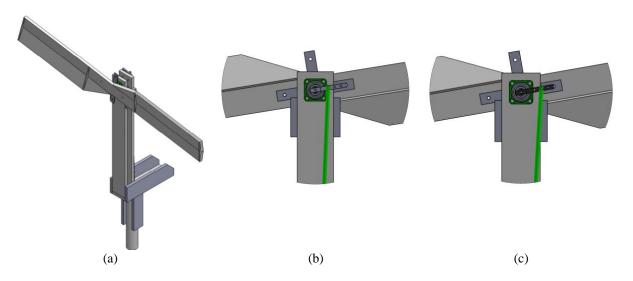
Salt farmer's windmill from Demak with two blades (a), 5 cm of crank shaft (b), 7.5 cm of crank shaft (c)
